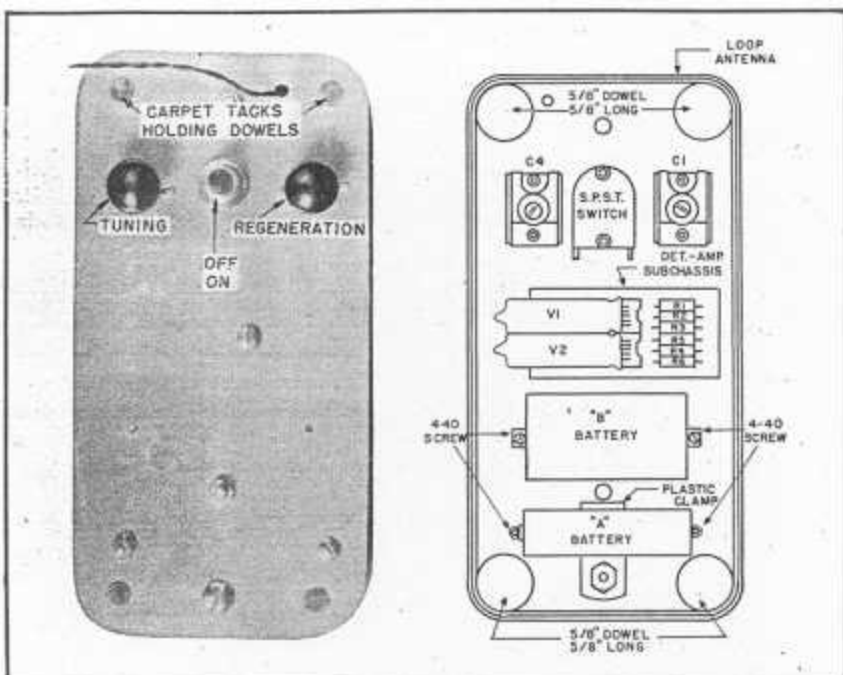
Front view of the receiver (left) showing location of the various controls. Mechanical drawing indicates how the various component parts should be placed.
